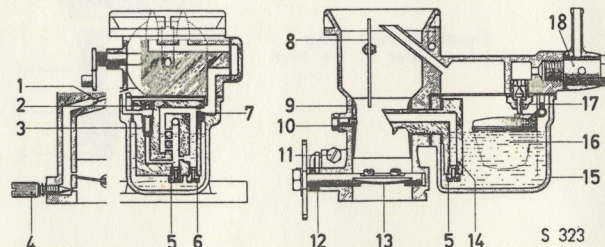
Carburetor Zenith 34 VNN, cut-away view
